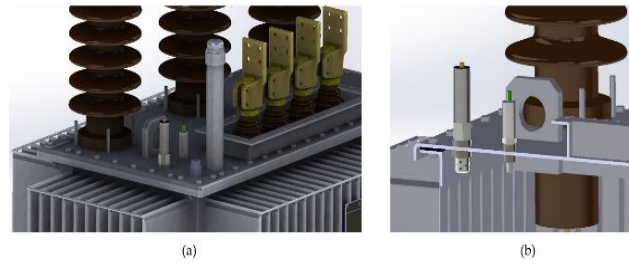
3D CAD model of Trafostick and E+E364 sensor mounted on transformer tank.
